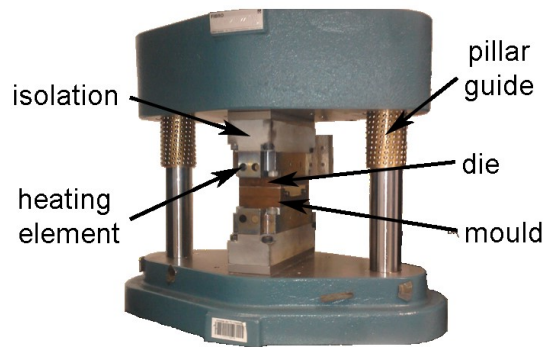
Joining tool for the discontinuous joining of the piezoceramic film with aluminium sheet
